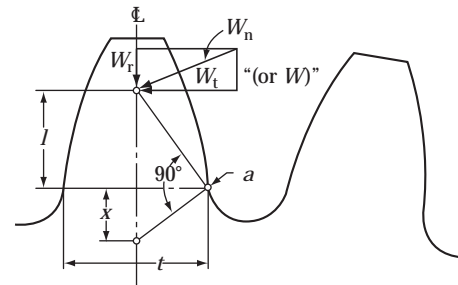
Determination of *x* dimension from a gear-tooth layout.
